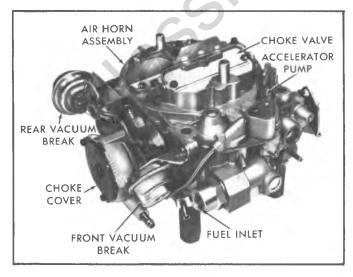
MQ-M4MC/M4MCA Quadrajet Carburetor
